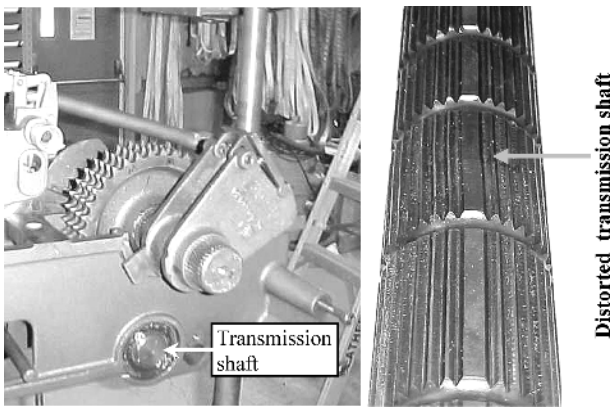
Distorted transmission shaft of the spring-loaded drive mechanism.
